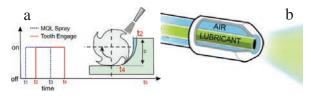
MQL in milling. (a) Illustration of tool-chip interface and MQL spray operation. (b) Dual-channel MQL flow.
